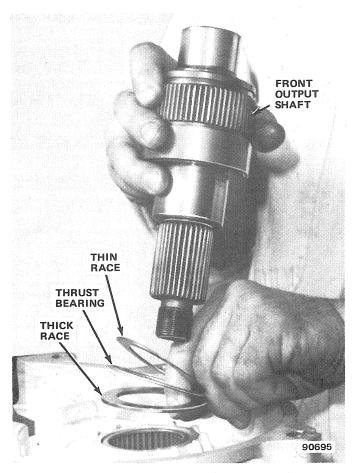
D-55 Front Output Shaft and Shaft Front Thrust Bearing Removal/Installation
